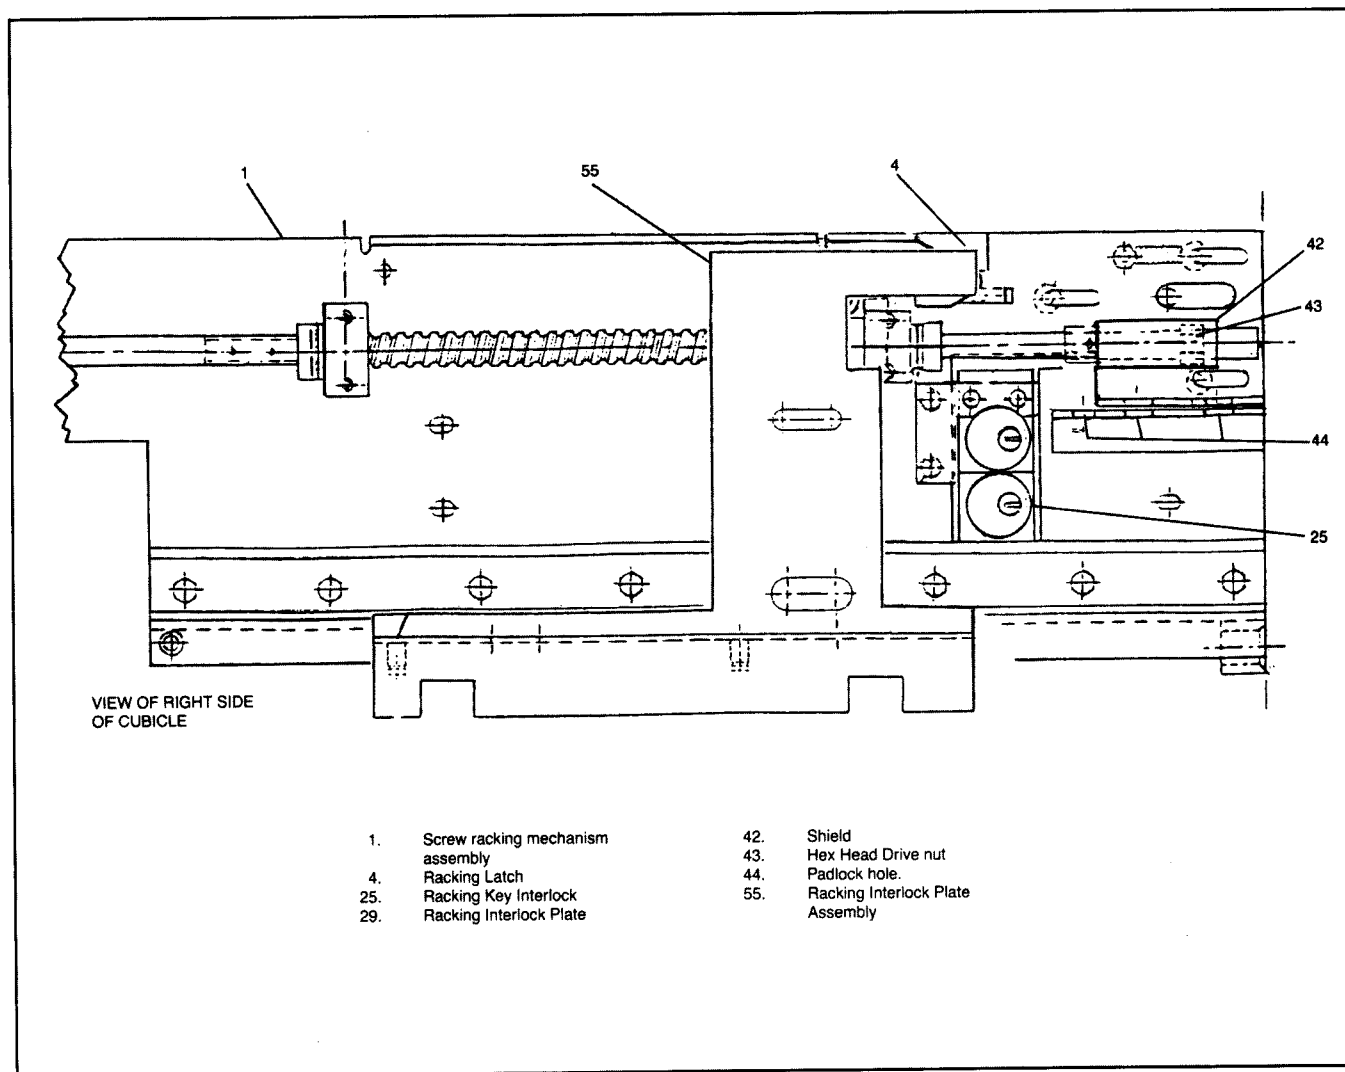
Closed Breaker Racking Interlock Plate Assembly (Superimposed over screw racking mechanism)
